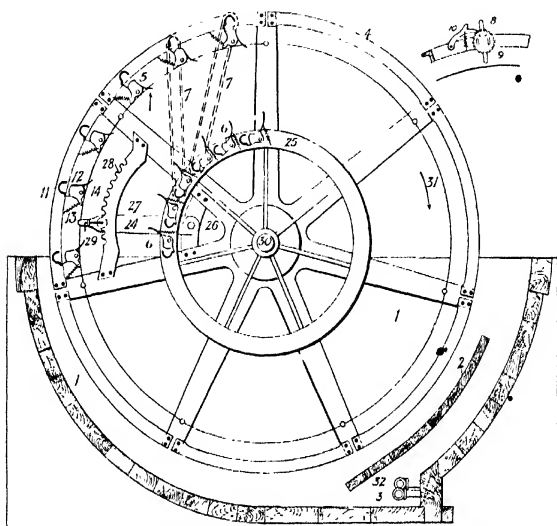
Klauder-Weldon Hank Dyeing Machine.
